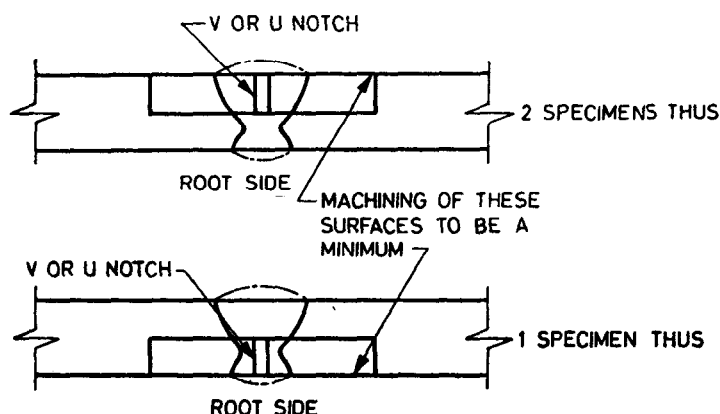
A V- OR U-NOTCH CHARPY TEST SPECIMEN
